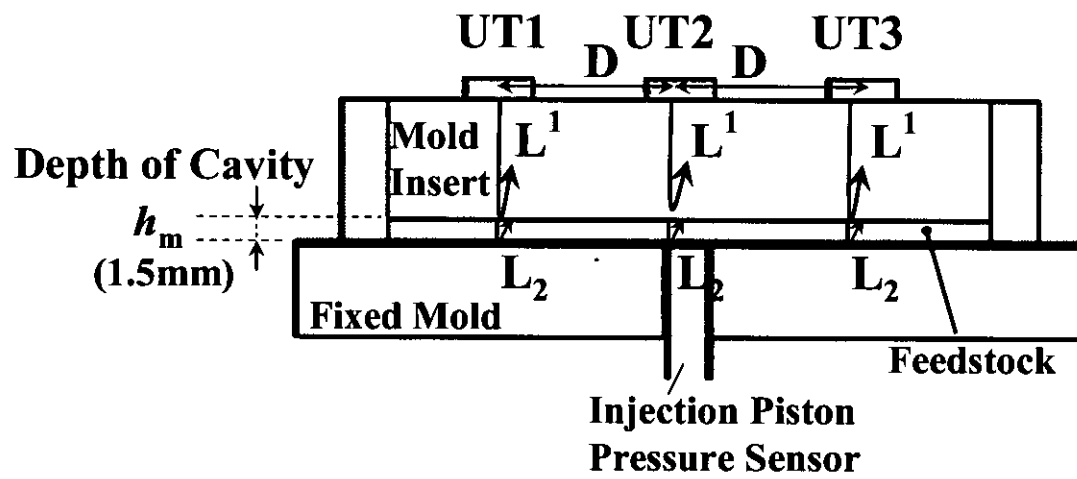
Cross-sectional view of the mold insert with the UTs and the paths of ultrasonic signals propagating in the mold insert and feedstock. The cavity had a diameter of 25mm and a depth of 1.5mm.
